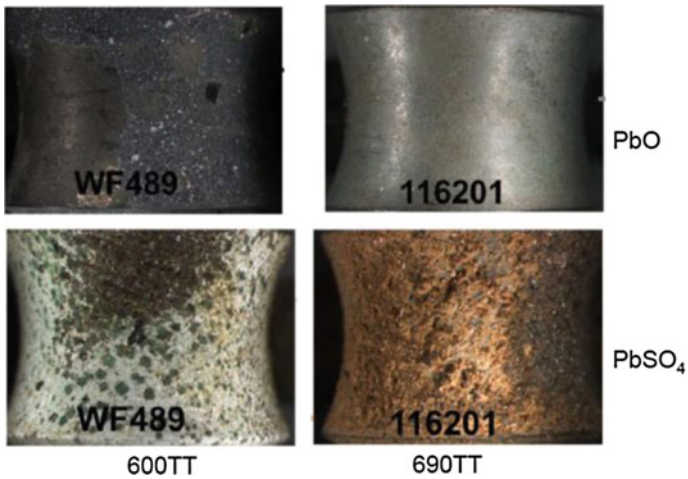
Surface observation of 4 RUB specimens after the 7000 h corrosion testing
